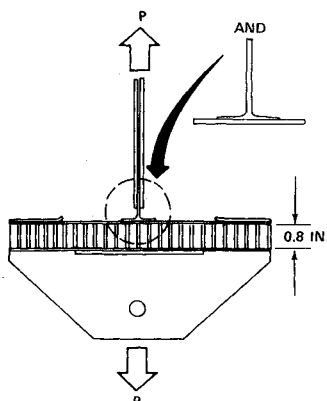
Tension tee test specimen, for testing tension in the bond joint between honeycomb skin and the frame/shear tee.
